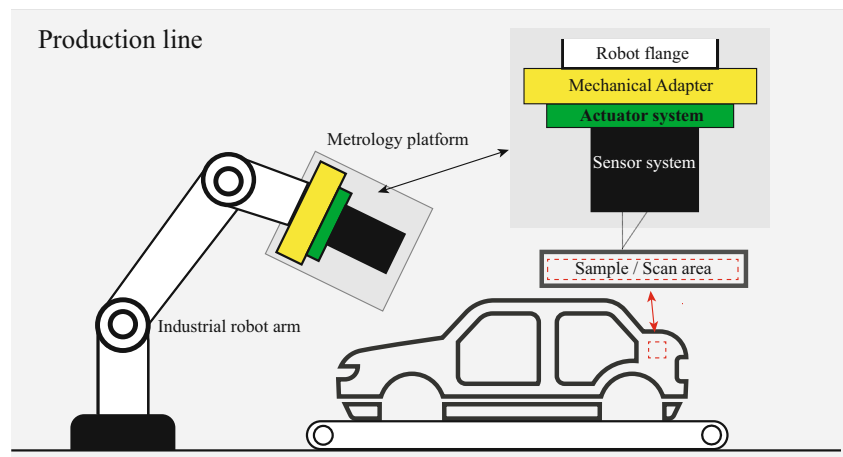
Robot-based in-line measurement system for surface and material inspection.
